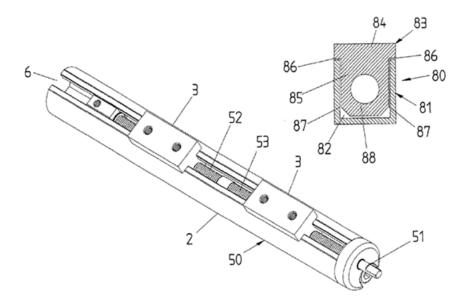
illustrates a gearing comprising primarily only a screw-and-nut mechanism having a nut (3) and a rotatable screw (53). Nut (3) comprises axial sliding means in the form of flat surfaces which slide on axial guide surfaces (86) and (87) of housing (81), thereby preventing rotation of nut (3) while at the same time allowing its axial movement.
